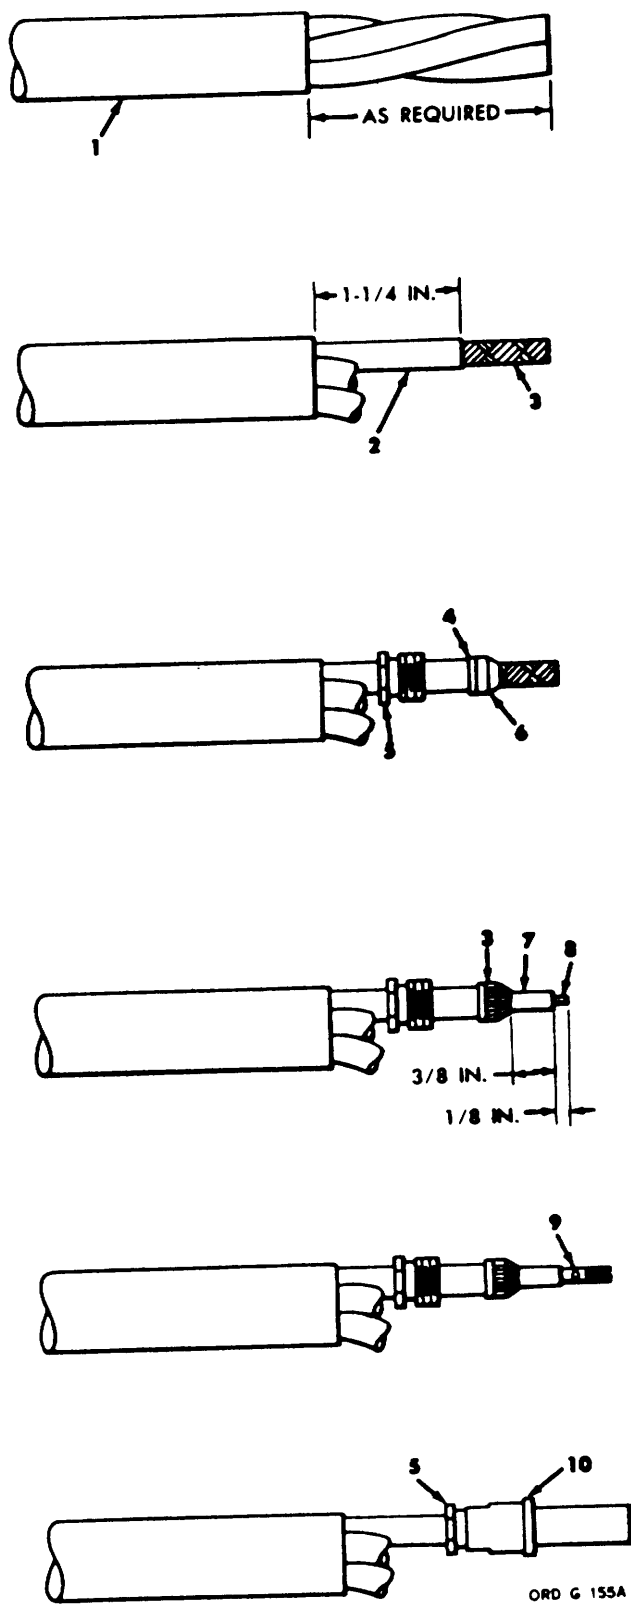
Finishing and termination of coaxial connector to coaxial fitting.
